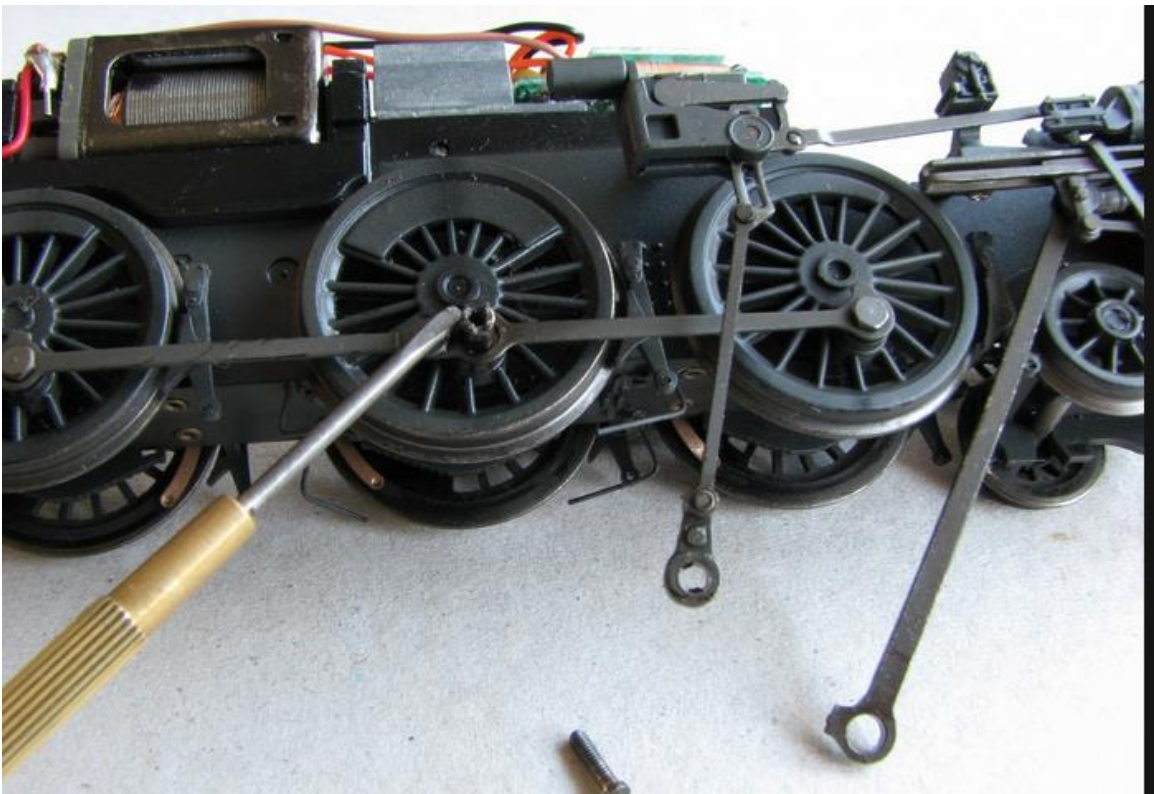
Next is the disconnection of the valve gear from the wheels. Simply remove the screw from the centre crankpin, and the return crank and the connecting rod can be lifted off. Do this on both sides, otherwise the wheels will not want to leave the chassis!
